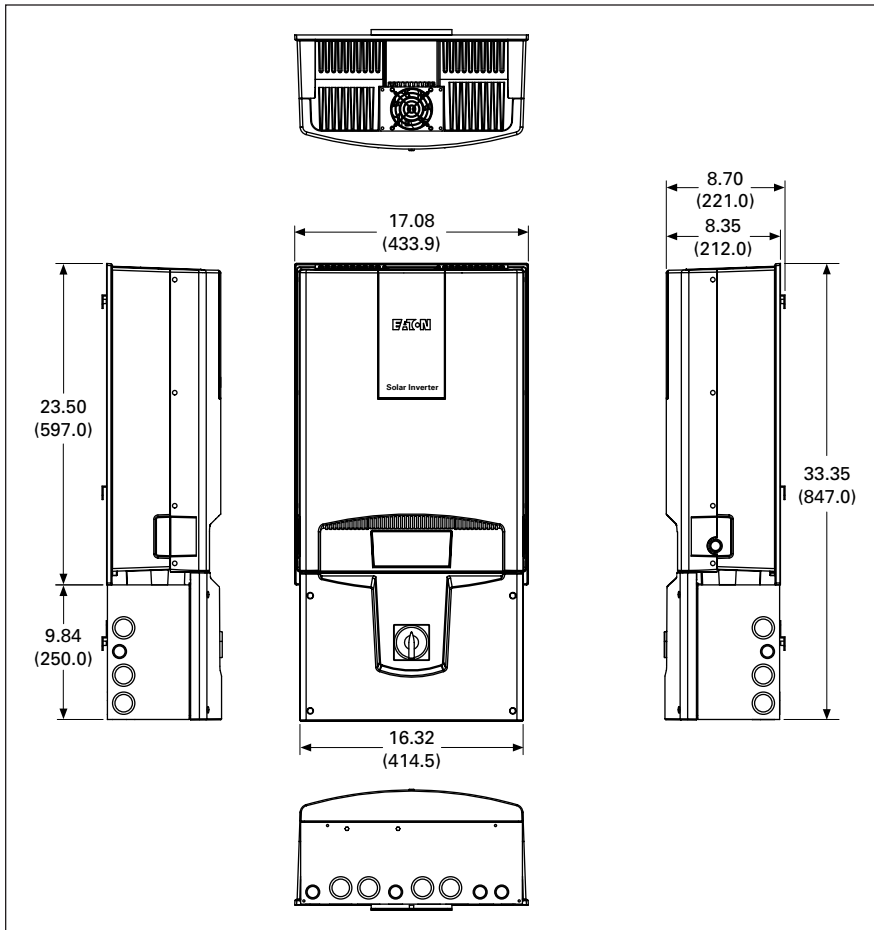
3.8-7 kW Grid-Tied Solar Inverter Dimensions
